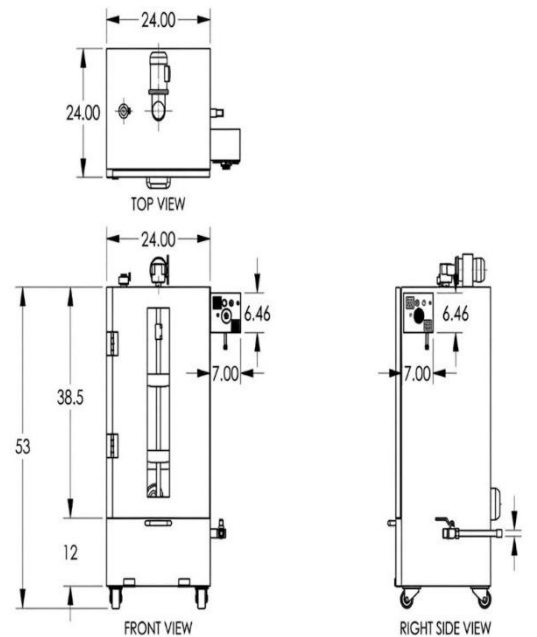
Orthographic Projection of the Multifunctional Thermal Machine (All measurements are in inches)
